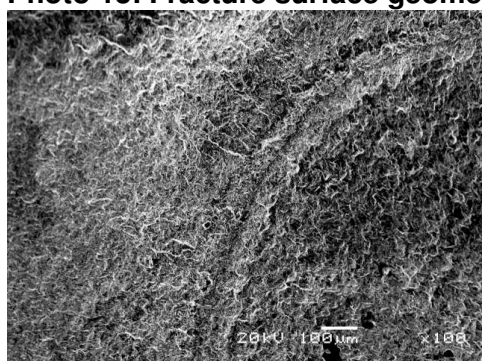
Fracture surface geometry showing beach-marks; bolt no 5 (x100, SEM)
